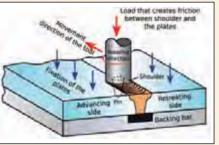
Friction Stir Welding (FSW) process.
